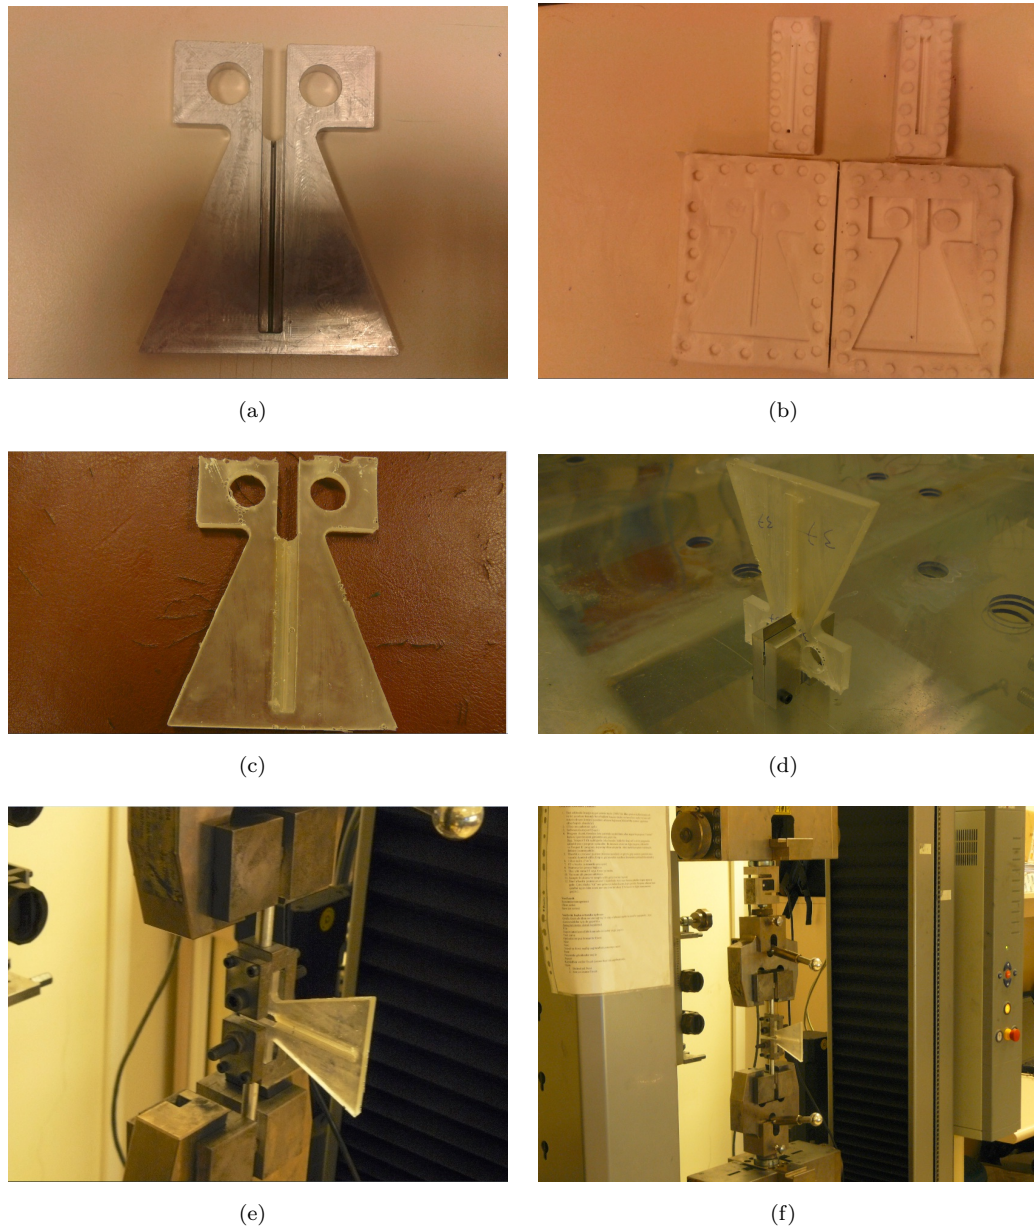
(a) Main aluminium model of TDCB geometry, (b) Silicon-rubber moulds, (c) Test specimen, (d) introducing a precrack, (e) image of specimen with testing apparatus and blue mark indicates the end of precrack, and (f) image from testing
